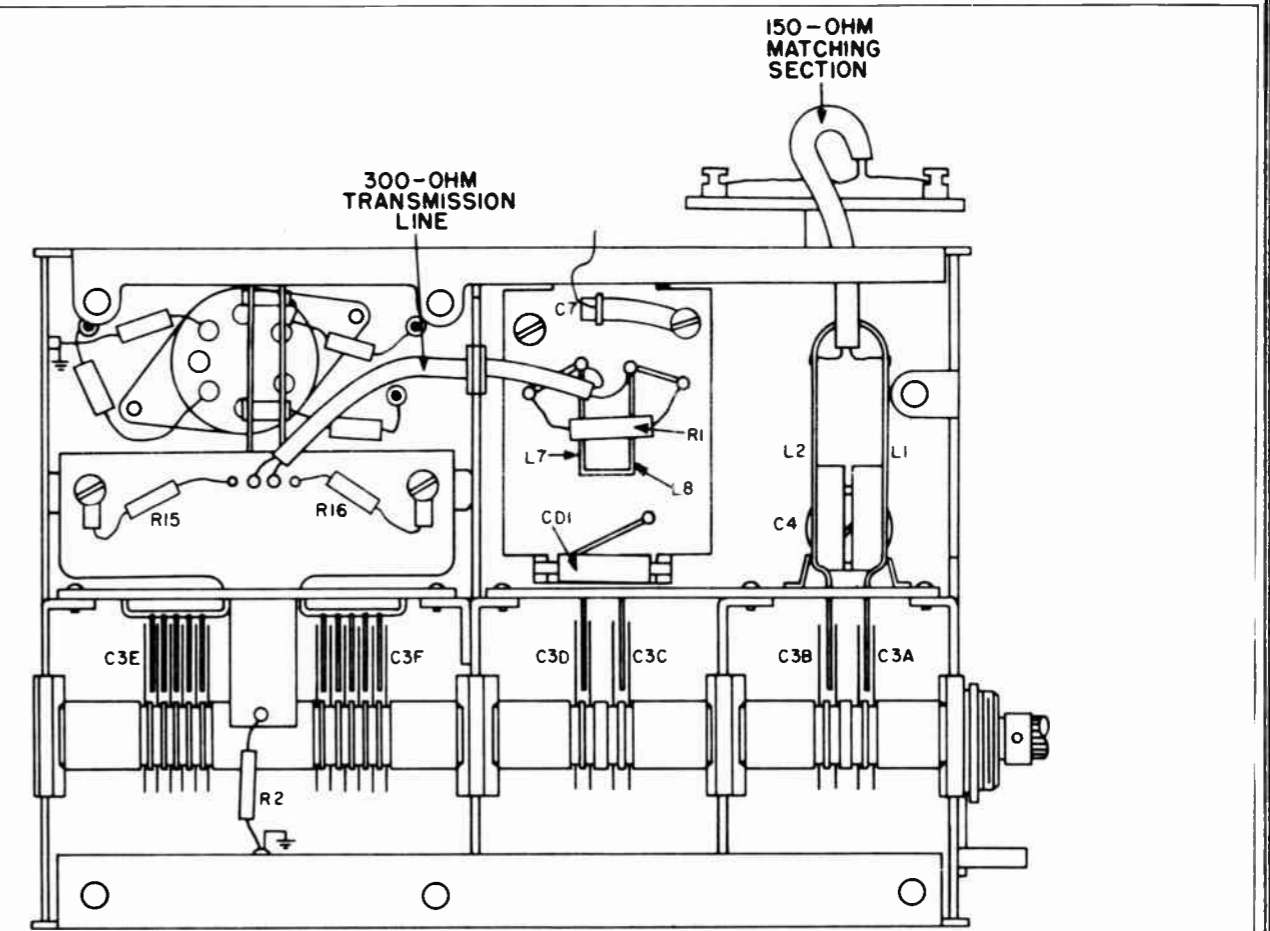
Base Layout of UHF Tuner-Adapter, with Oscillator and Mixer Boards in Place
